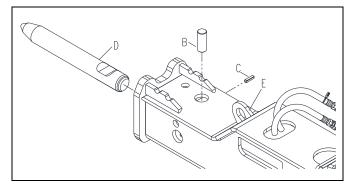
Remove smaller pin (C). Next, remove large pin. (B)
